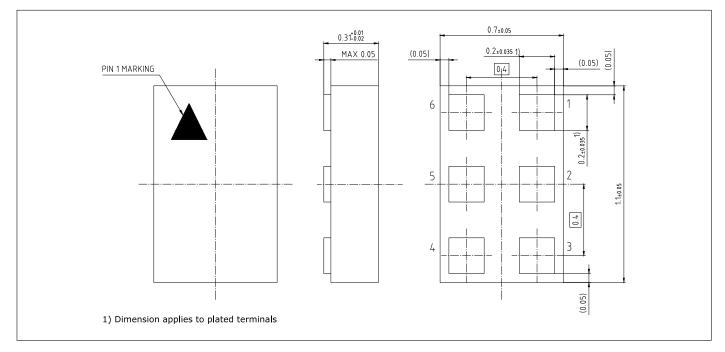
TSLP-6-4 Package Outline (Top, Side and Bottom Views)
